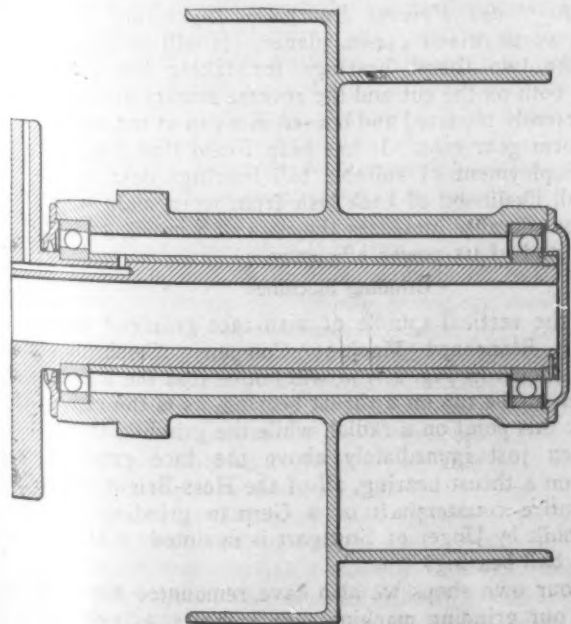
Ball Bearing for Pulley of a Heavy Grinder Made by the Pratt & Whitney Company, Hartford, Conn.
